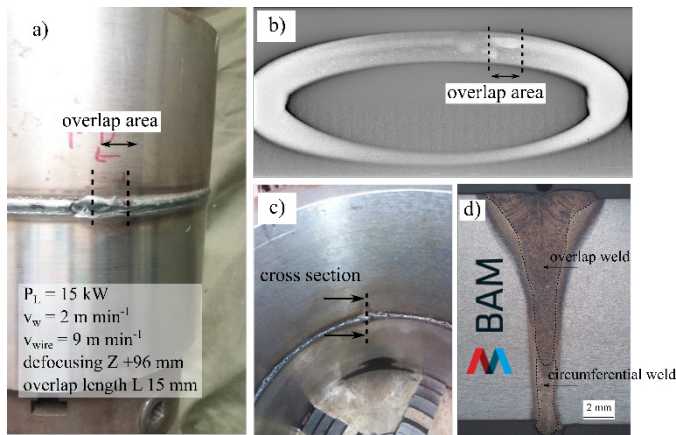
Hybrid laser-arc welded 15 mm thick pipe segment: (a) outer appearance of the circumferential seam surface; (b) X-ray image of the pipe segment; (c) outer appearance of the weld root; (d) cross-section of the overlap area.
